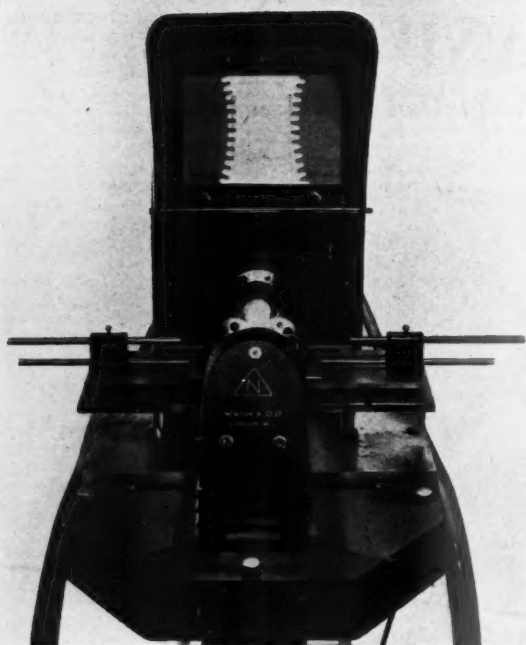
Newton projector set up for inspecting small gears.
